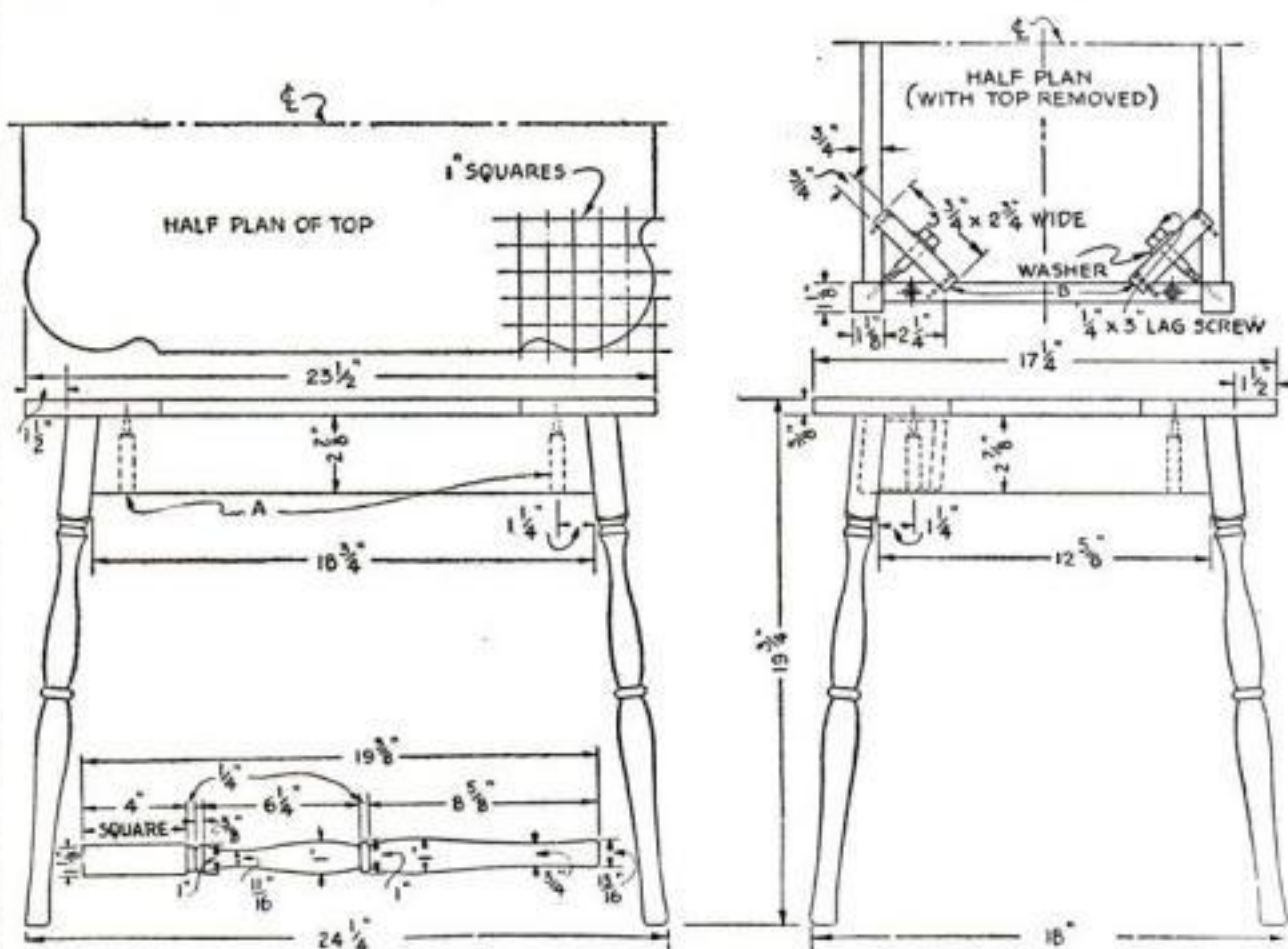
Side and end elevations of the child's table and two plan views, one showing half the top with squares for laying out the corners, and the other, how the frame is assembled.
